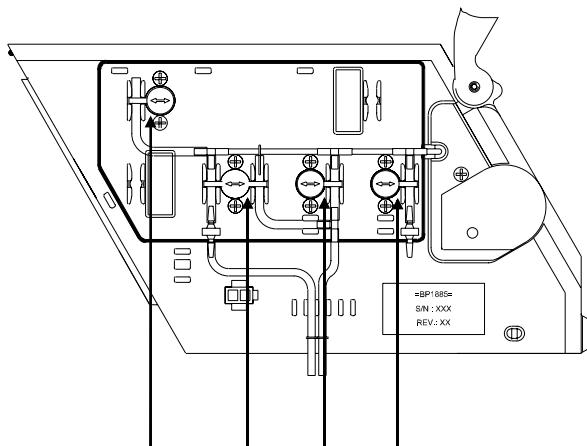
Solenoid valve relief clamps - Fill port module C1
